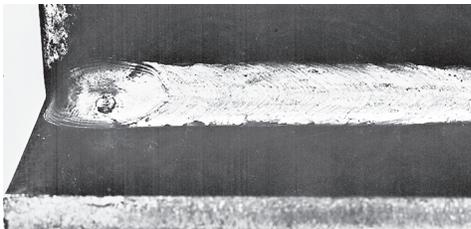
A fillet weld made with flux cored arc welding.
